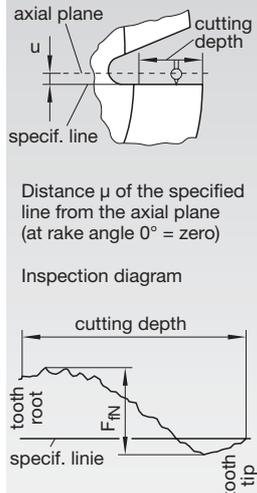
Form- and positional deviation of the cutting faces to DIN 3968
